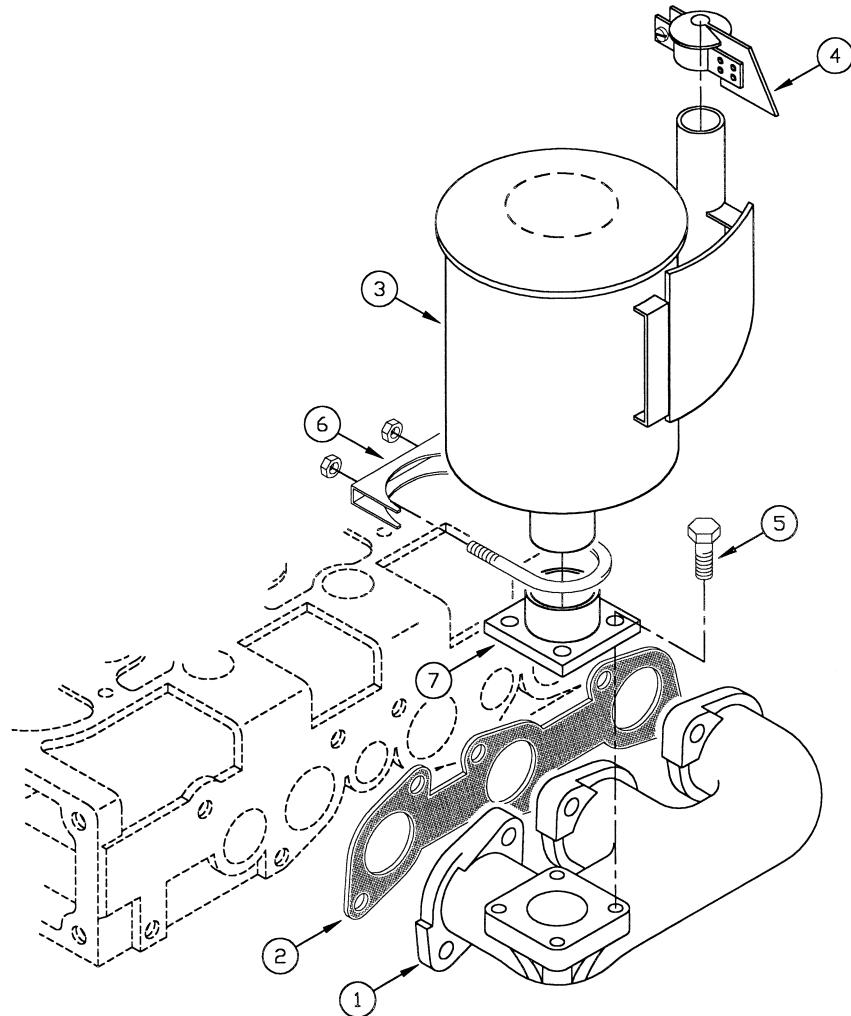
Exhaust Manifold and Muffler Assembly, Engine Group
